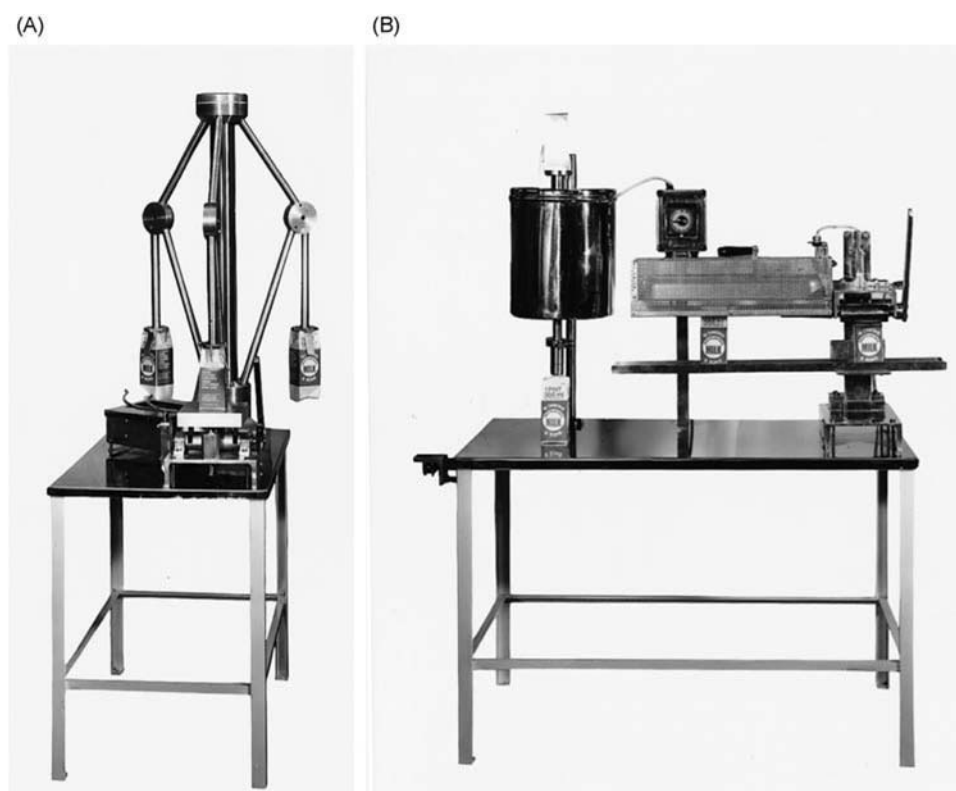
Hand-operated packaging equipment for filling yoghurt into cartons. (A), Carton maker/sealer, (B), hand filler sealer.
